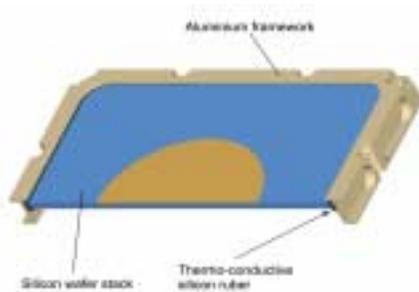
Cut view: The assembly of silicon wafer stack can be made by mould curing directly in the supporting framework
